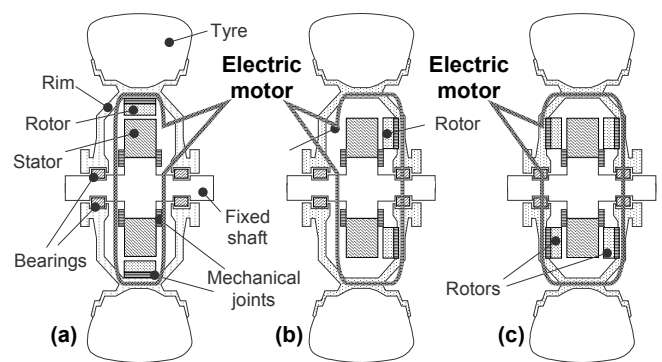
In-wheel motor assemblies: radial (a), single-side axial (b) and double-side axial (c) configurations.
